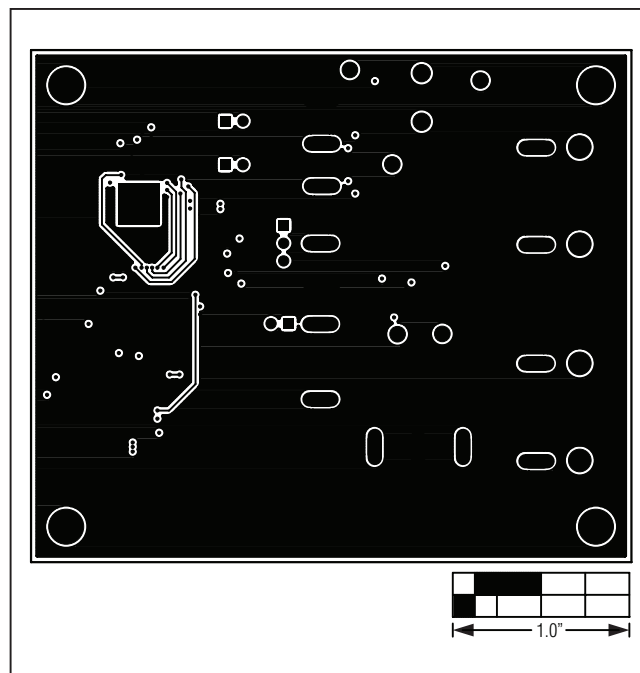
MAX97003 EV Kit PCB Layout—Solder Side
